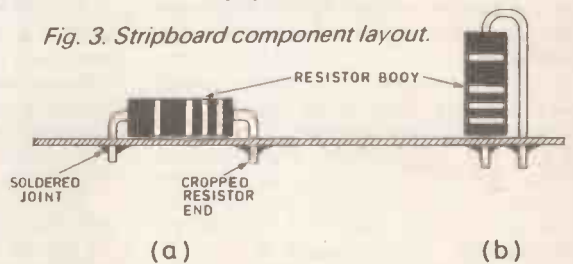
Component mounting. (a) resistor mounted flat on board. (b) resistor mounted perpendicular to board.
